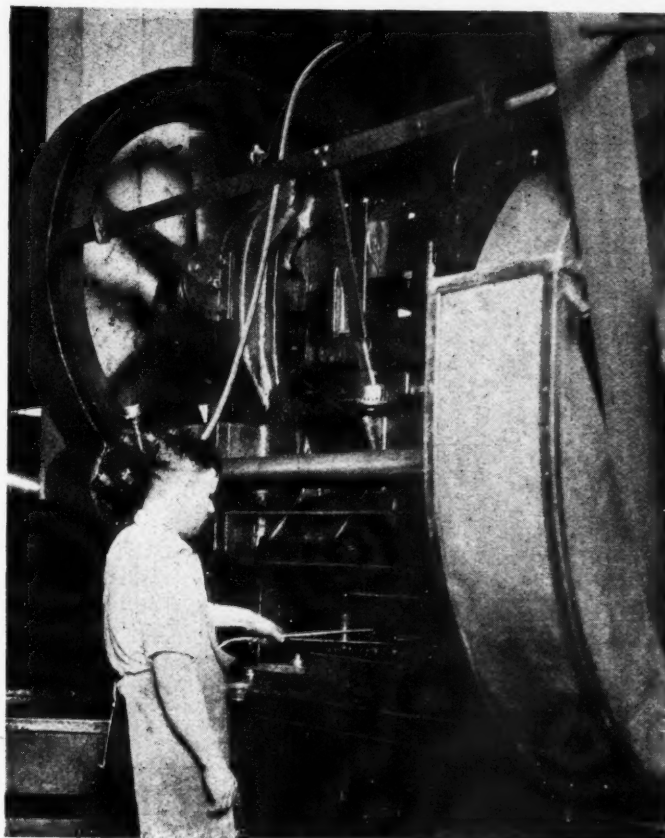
Vacuum attachments for removing stock from dies without reaching in and endangering the hand
